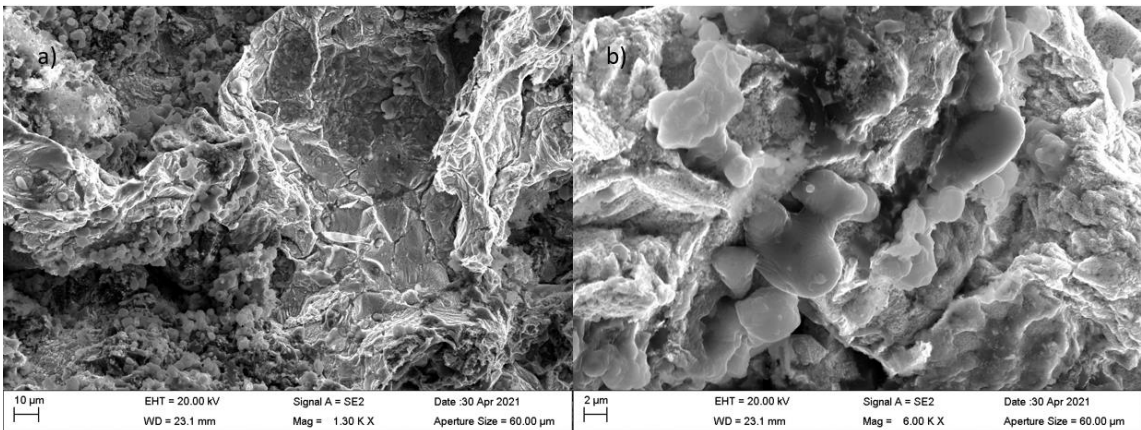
shows closer view of the unusual parts of the fracture surface. There is clearly some indication and features pointing towards ductile fracture but also areas that are clearly
